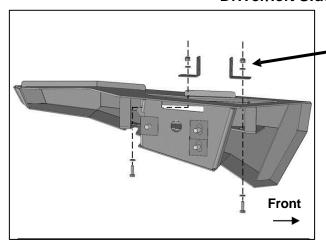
Insert (1) Double Bolt Plate into and through inner slots in Wing assembly
